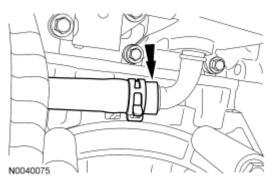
Locating Bypass Hose To Coolant Outlet Courtesy of FORD MOTOR CO.
